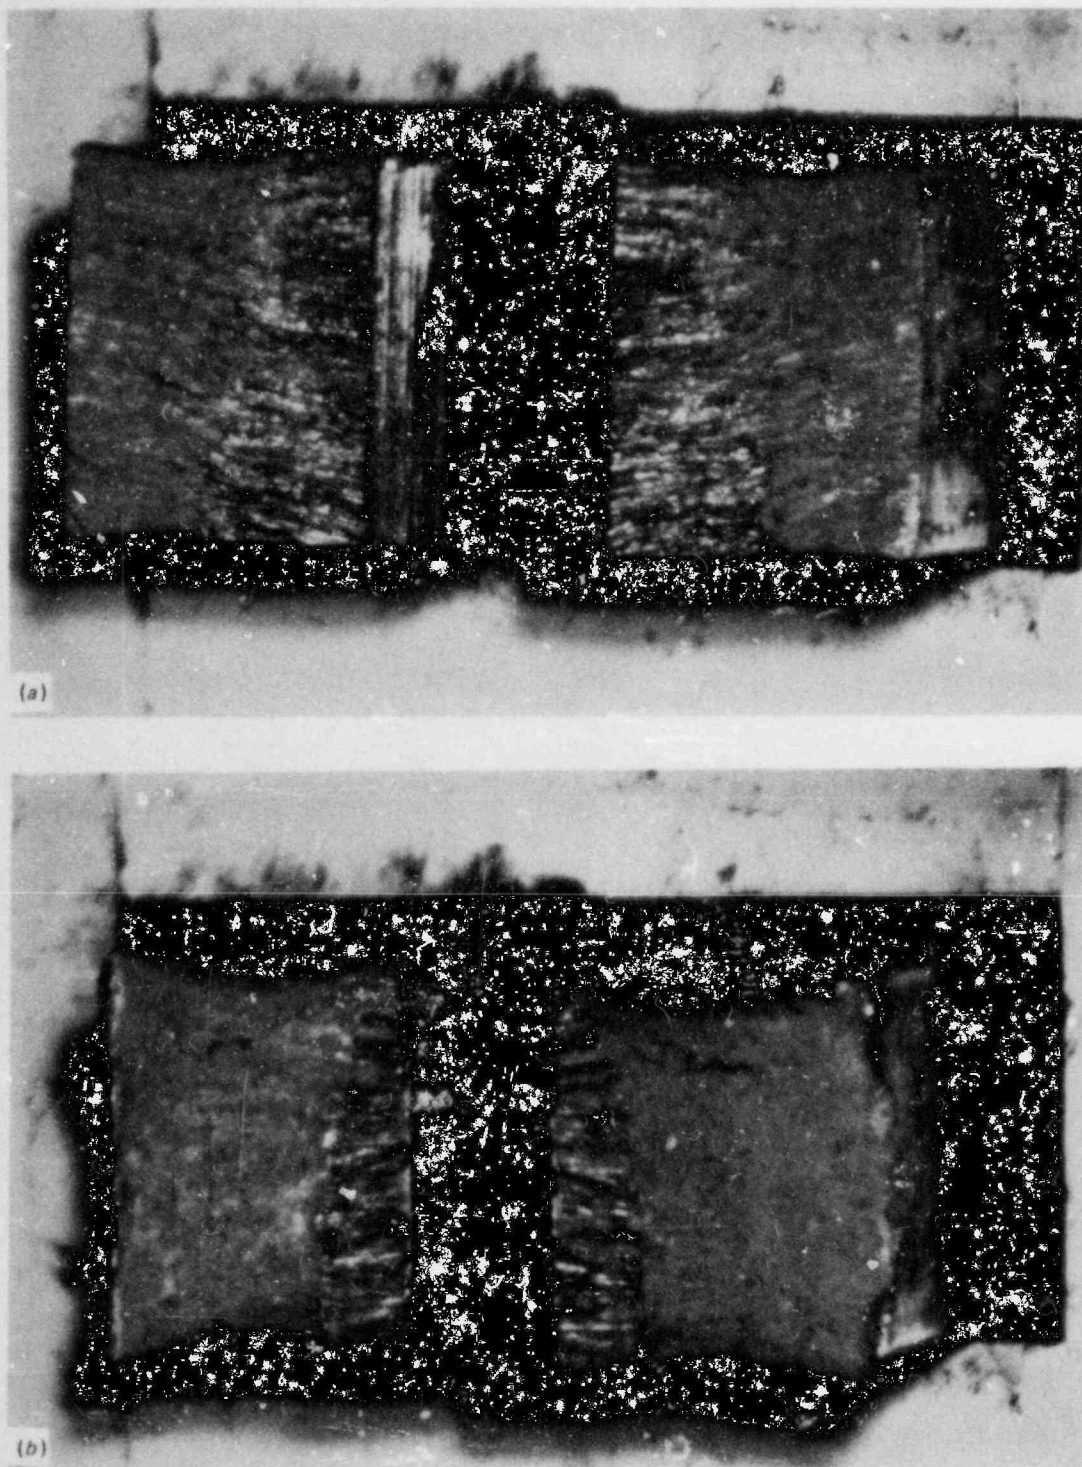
Fracture surfaces of irradiated stainless steel cladding Charpy impact specimens (nominally type 309) clearly showing bright, faceted type 309 weld metal pass directly below notch and duller type 308 weld metal comprising rest of specimen. (a) Specimen CPL-515 tested at 0°C in very low-transition region and (b) specimen CPL-518 tested at 250°C on upper shelf.
